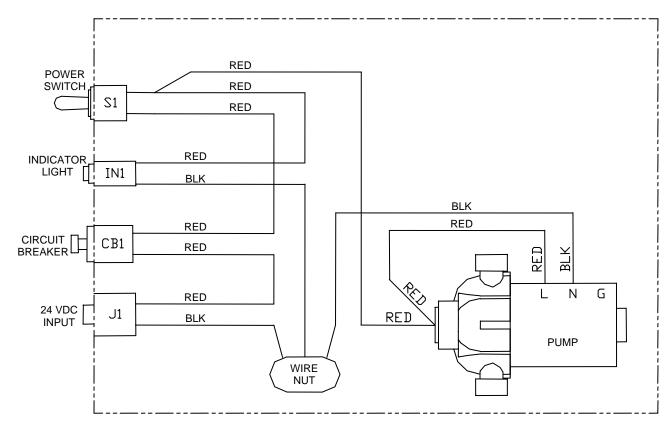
Sink Fill Pump Assembly Wiring Diagram.
